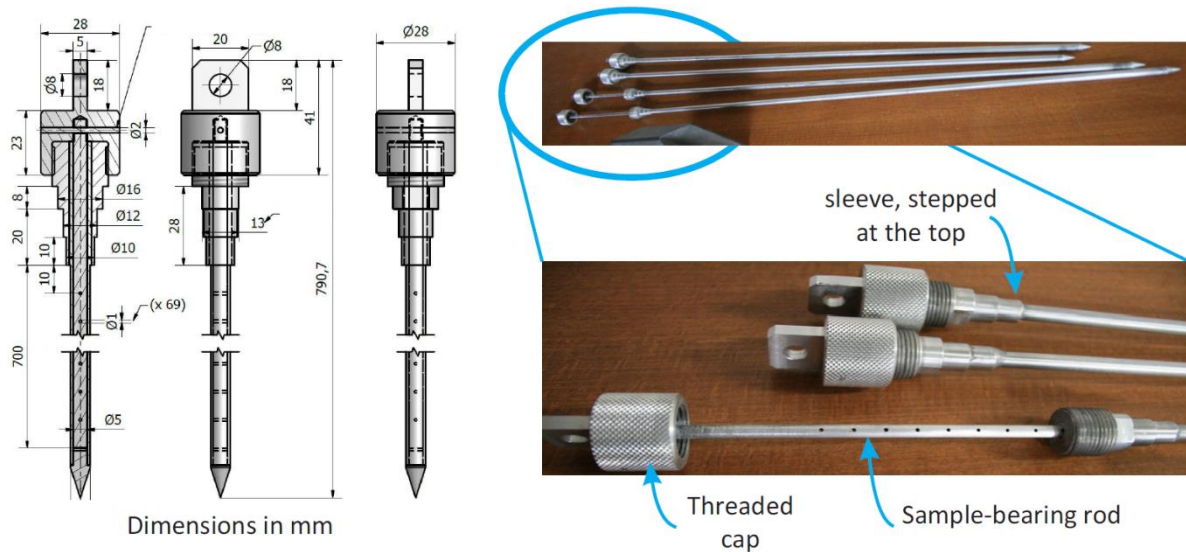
Aluminium probes used for the neutron dosimetry measurements. Left: technical drawing, right: photograph of 4 probes.
